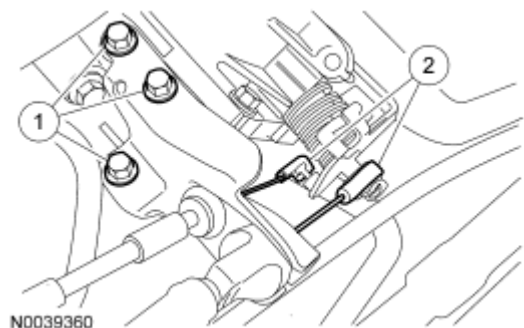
Identifying Accelerator & Speed Control Cable And Bolts
